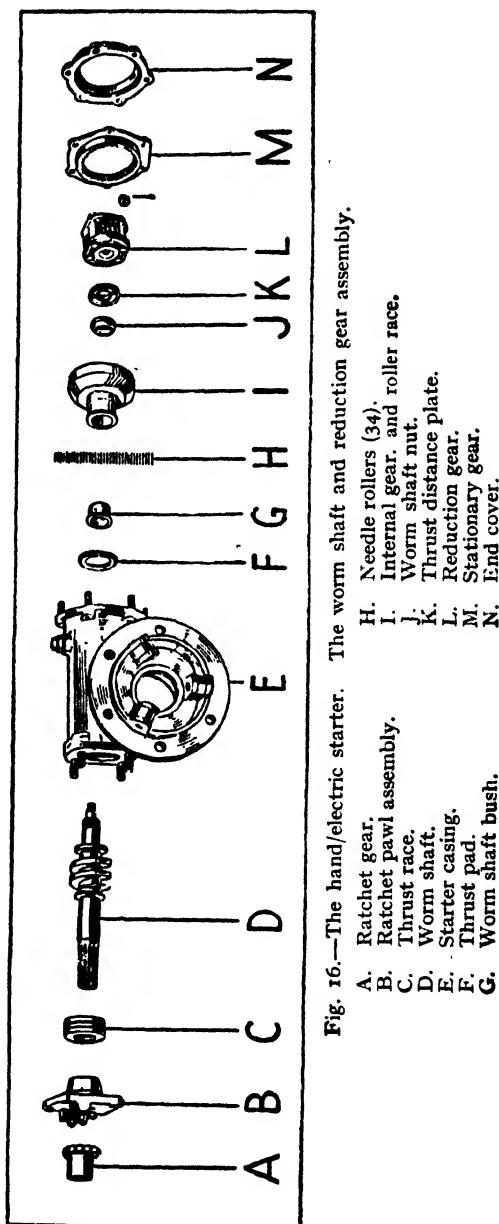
The hand/electric starter. The worm shaft and reduction gear assembly.
